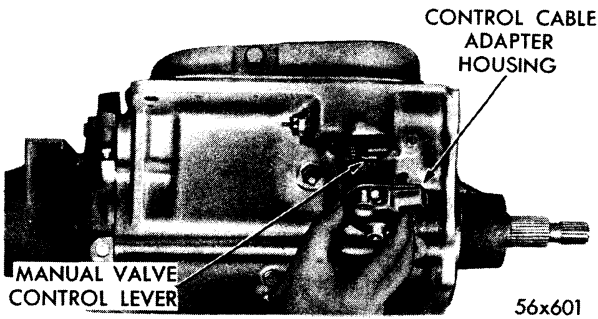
Removal and Installation of Control Cable Adapter Housing
